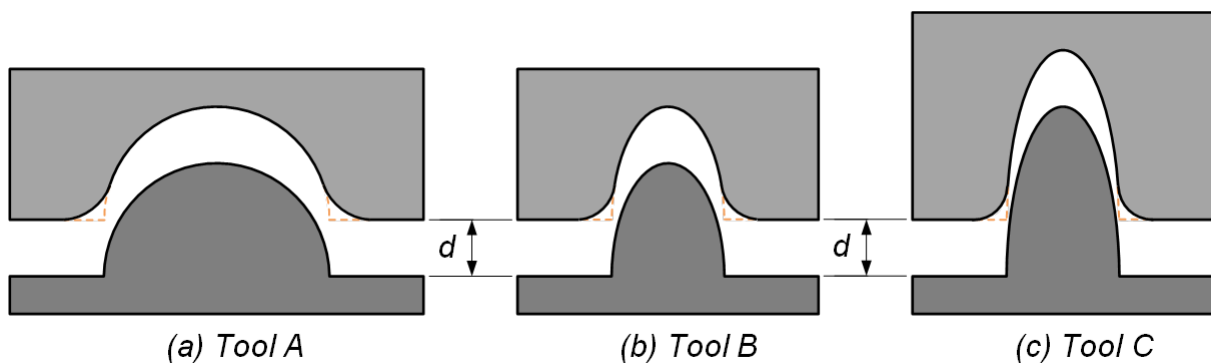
Assembly models of tool A (a), tool B (b), and tool C (c) with rounded concave tool.
